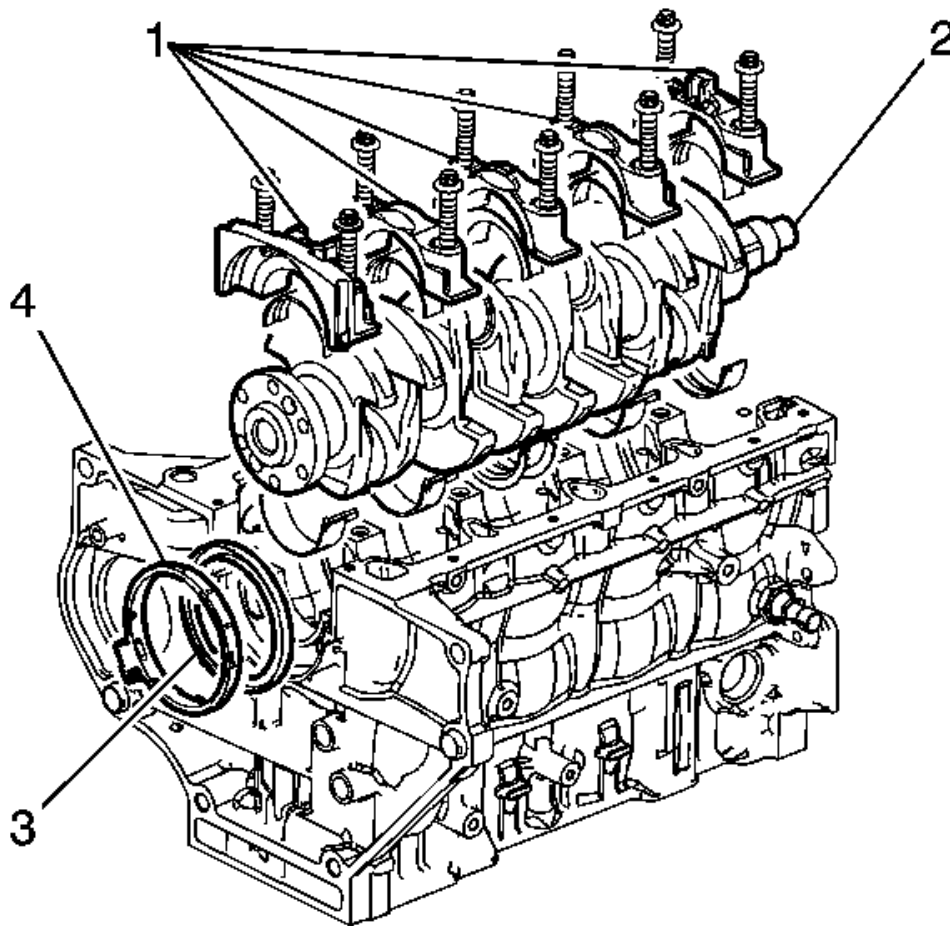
Crankshaft, Crankshaft Rear Oil Seal, Crankshaft Bearing Caps & Crankshaft Bearing Cap Bolts
